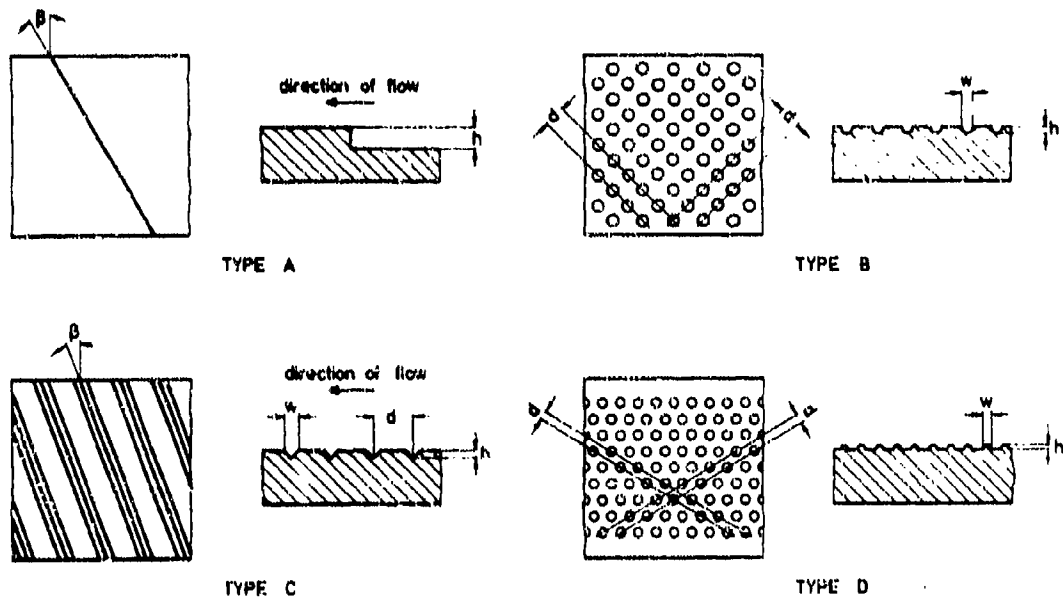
TYPES OF MACHINED ROUGHNESS TESTED
